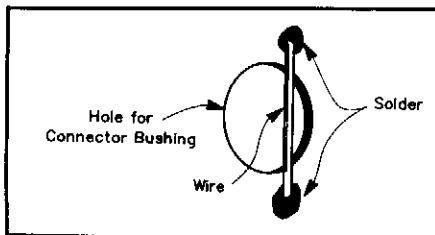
Solder a wire or piece of brass sheet across a round hole to make D holes for connectors with flatted bushings.
